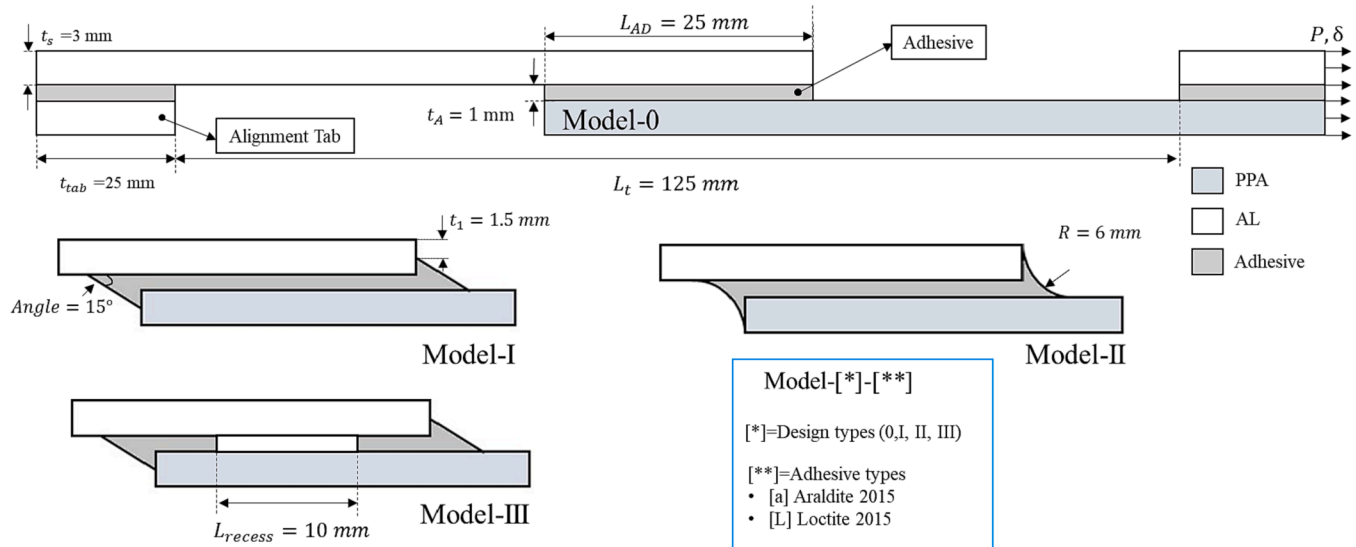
Dimensions and geometry of SLJs (a) unmodified (without fillet) (b) with fillet and recess.
